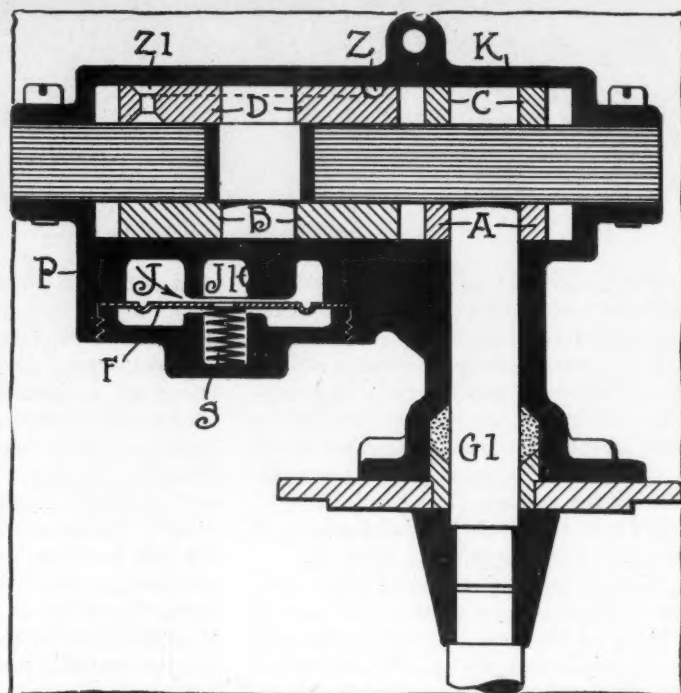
SECTION OF MAXWELL DOUBLE OIL PUMP
